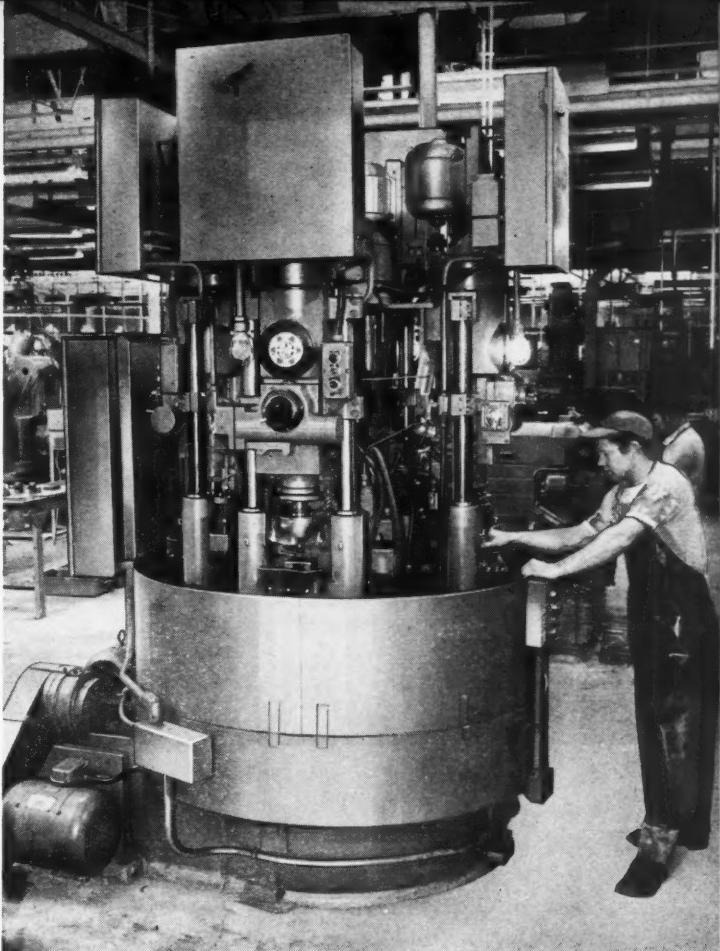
Shaft holes in the rocker arms are finished while the arms make one revolution around this four-station continuous honing machine
